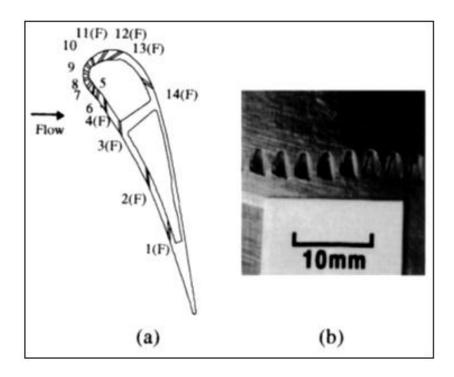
(a) Cross-section of NGV with full film cooling geometry, holes marked F are fin shaped holes. (b) Fan-shaped holes [Guo, 1998].
